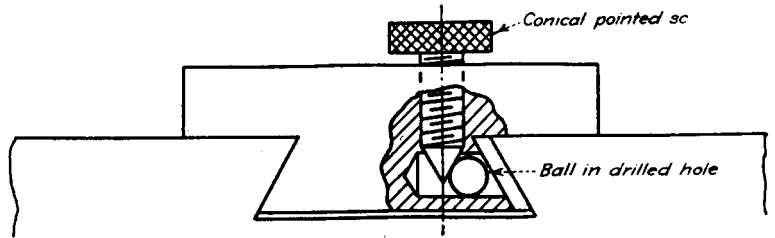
Screw contact causes the ball to exert an outward pressure against the gib. The gib is loosely pinned to the movable part. This slide can be applied to broad surfaces where it would be impractical to apply adjusting screws through the stationary part.
